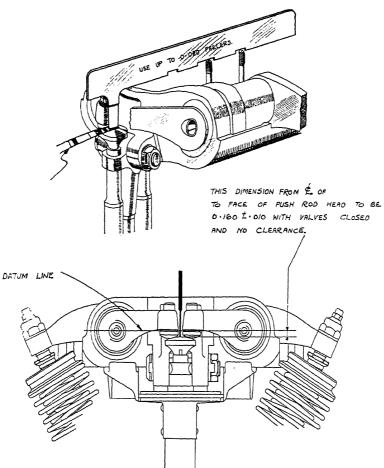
Showing application of gauge for checking bocker angle of attack.
